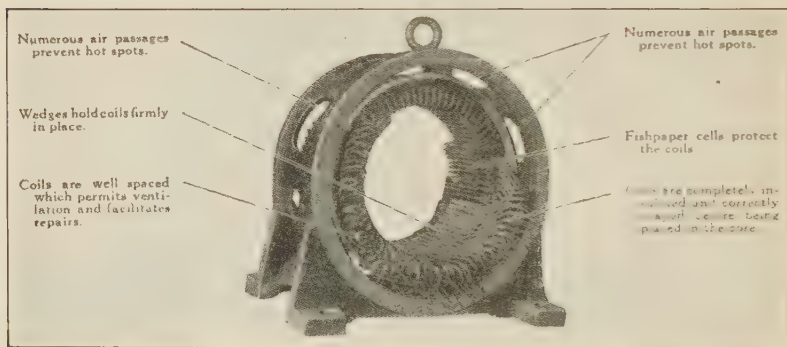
Windings being placed in a Westinghouse 600-800 frame stator.
